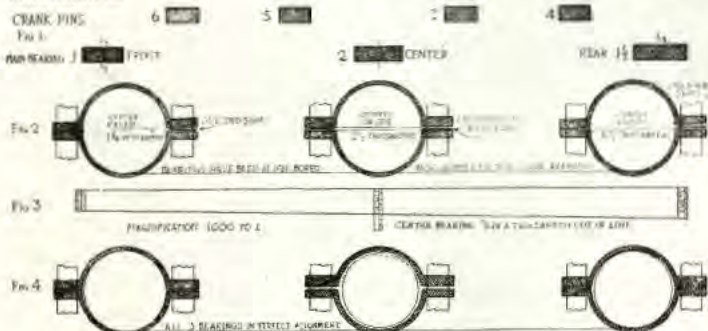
represents the undersize diameter of the 4 crank pin bearings which your micrometer would measure as 1.242, 1.243, 1.245, 1.244 or when mentioned as undersizes would be .006, .005, .003, .004. But being just crank pin bearings this variation does no harm as each connecting rod can easily be adjusted to its respective crank pin. When a crank shaft shows considerable wear, say .006 or more as in the case of this front crank pin, then it should be measured for out-of-roundness, and if found to be out-of-round on any bearing more than .0005 should be thrown away as unserviceable. For that man does not live, who can make it stay tight. (See Fig 7). This statement does not mean that you cannot fit a crank shaft by the K. R. W. process that is worn more than that or that you must discard crank shafts worn five times as much. It is only a suggestion that will save you money and give your customers a satisfactory repair job that will stand up and render long service, without causing trouble. I have often heard remarks like these: "We burn-in crank shafts that are .003 to .005 out-of-round." "Our customers won't stand for a new shaft unless the old one is broken." And I know some repairmen who secure most of their repair parts from junk yards and second hand stores, too. But that doesn't mean anything because the class of work they turn out is so rotten it speaks for itself. One look at Fig. 7 will convince a schoolboy that a single revolution of an out-of-round crankshaft will make the babbitt lining as large as its largest diameter, and after that the eccentric or cam shaped bearing will act just like a rotary pump and squeeze most of the oil out of the bearing, so that an unbroken oil film cannot be maintained; the result is insufficient lubrication and rapid wear. A short lived and expensive job at its best. This example proves that regardless of what process is used in fitting bearings, you cannot overcome that obstacle, and I am sure you will find it cheaper in the long run to install a new shaft to replace any of those worn out-of-round more than .0005 on any bearing, than to attempt to use a bad one that will cost more time and money to fit and is sure to cause trouble. Your customers WILL stand for it just as soon as you "sell" them on the idea. Use these pictures to argue the case if necessary. Then when a job is turned out, your customer is satisfied and a booster, instead of being dissatisfied and a "knocker" and don't forget that come-backs absorb profits you make on other jobs. MAIN BEARINGS ARE MOST IMPORTANT and if you discard all crank shafts with crank pins worn more than .0005 out-of-round then you will seldom find a main bearing on a serviceable shaft that is worn more than from 1 to 3 thousandths, and usually much less than this amount. In this diagram I have shown an average with crank-pins being worn up to the limit. So I'll use this for an example to explain the ease with which main bearings can be fitted.
